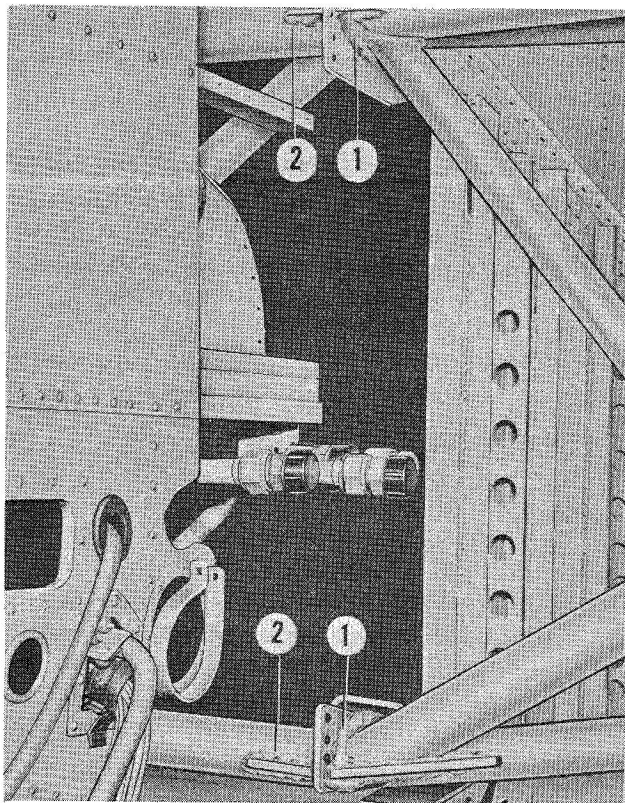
Drag Tube Fitting Splice 45B-3-43
